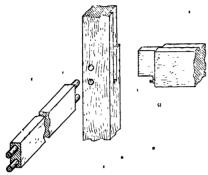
Joints of Side and Back Rails to Back Upright of Tiled Hall Stand.
